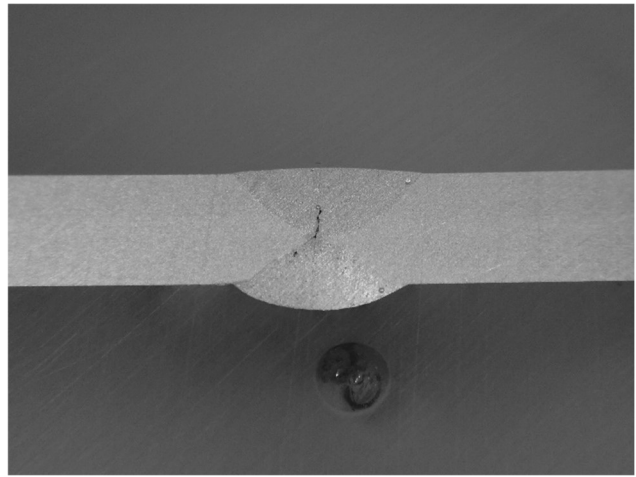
3003-H14 aluminum plate welded with ER4043 rod. Ground to 600 grit finish then etched with AWS D1.2 Basic Etchant.
